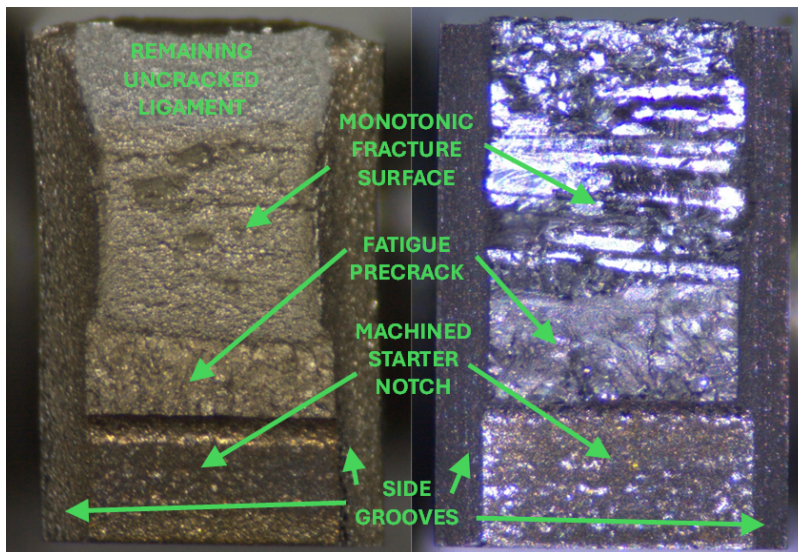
(Left) fracture surface image of ductile AFA specimen that demonstrated stable fracture and (right) fracture surface image of brittle FeCrAl specimen that exhibited unstable fracture. Note that the final crack length of the ductile specimen has been marked via heat tinting. Also note the difference in fracture surface texture, with the ductile specimen displaying a fine, dimpled fracture surface texture, whereas the brittle specimen displays a coarse, faceted texture. Fracture lengths were measured in accordance with ASTM E1820-18 [36], with nine evenly spaced points at the initial and final crack fronts
